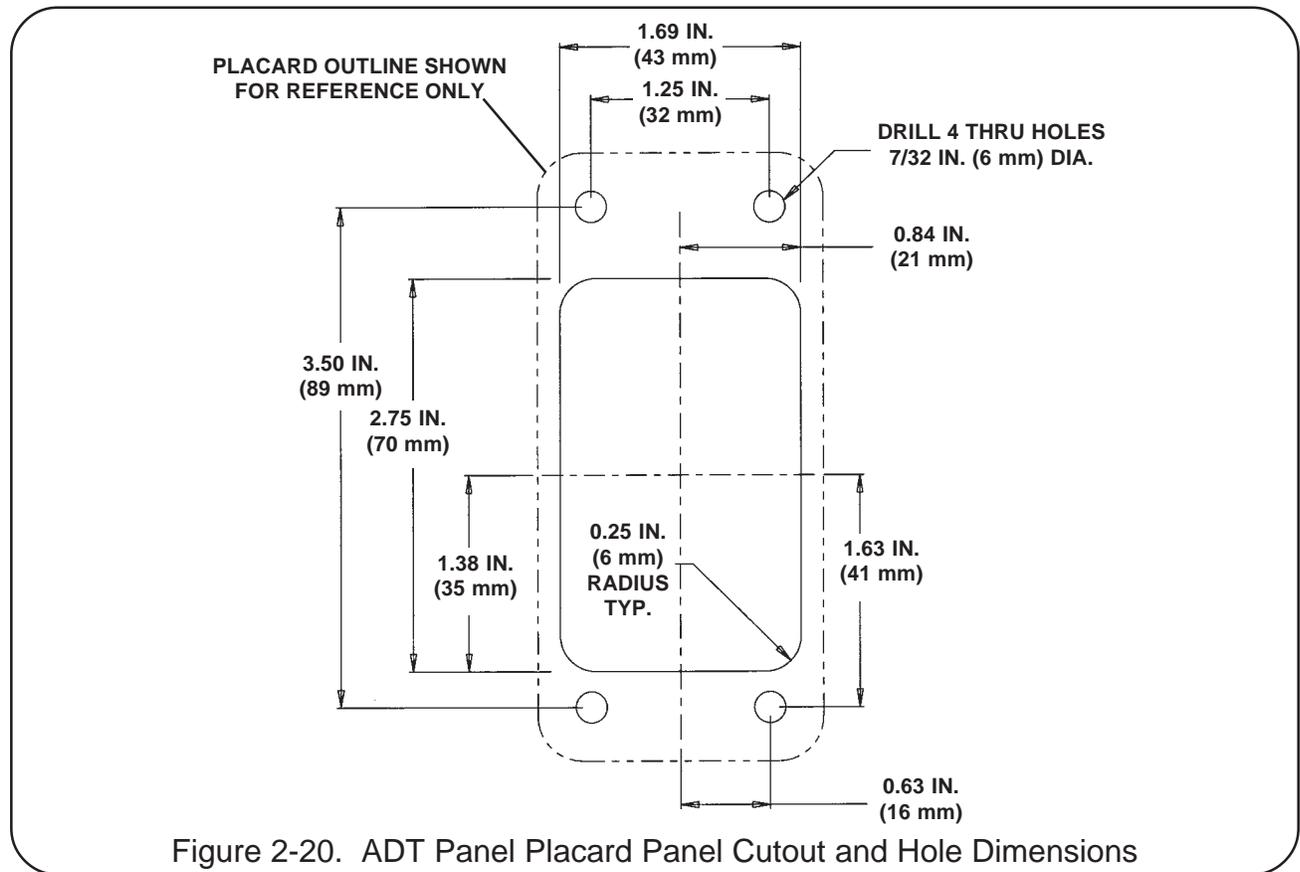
ADT Panel Placard Panel Cutout and Hole Dimensions
